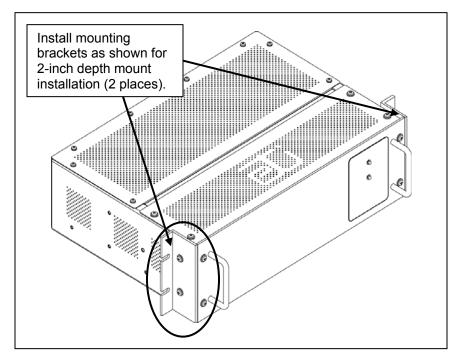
MOUNTING BRACKETS IN 2-INCH DEPTH POSITION.
